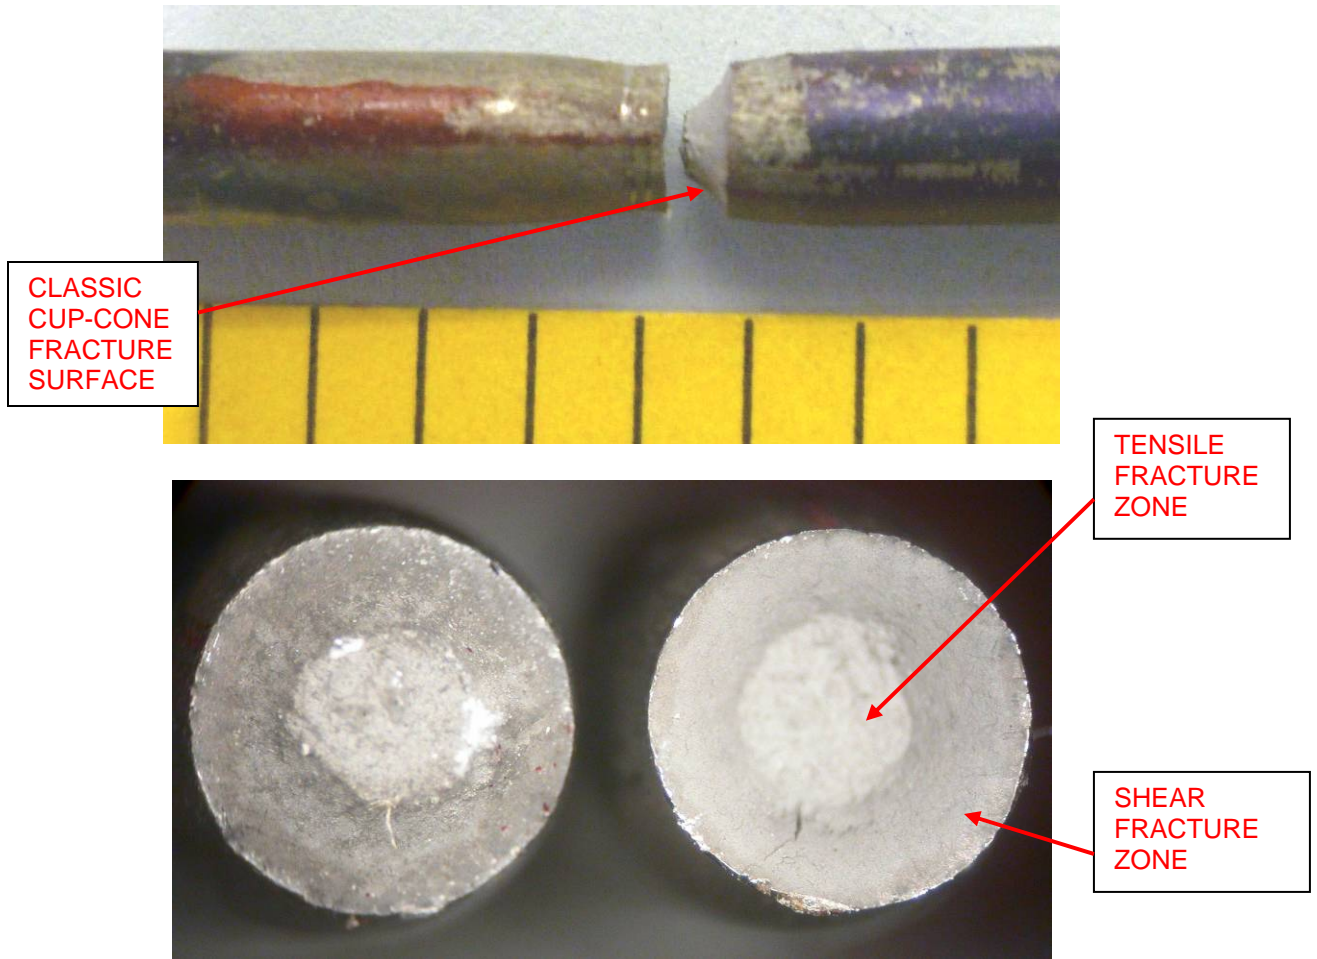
Sample of classic cup-cone fracture surface with corrosion Stage 1.
